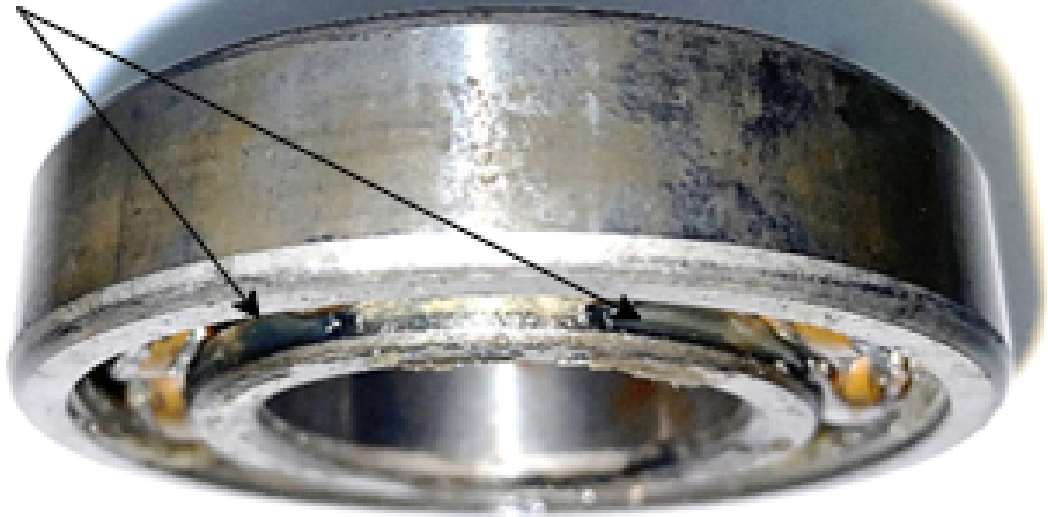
Corroded Surface of a Rolling Bearing [13]
